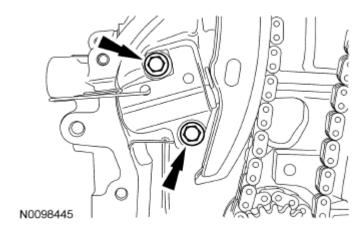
Compressing Timing Chain Tensioner Courtesy of FORD MOTOR CO.
